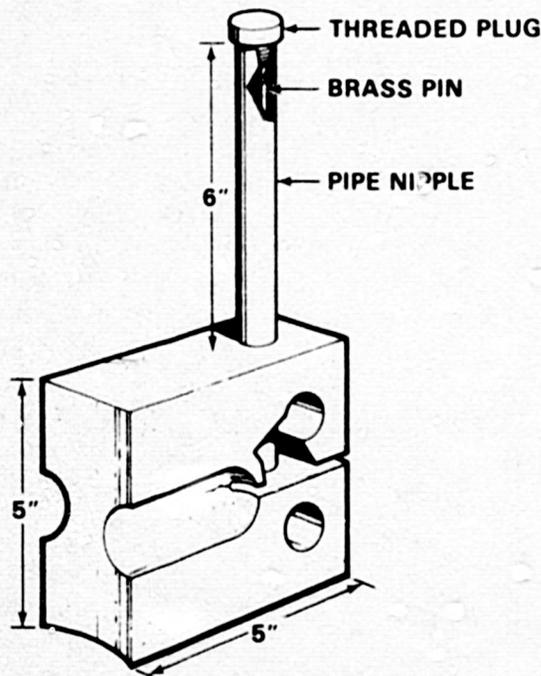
Fracture Specimen - Watts Bar, Unit 1.
